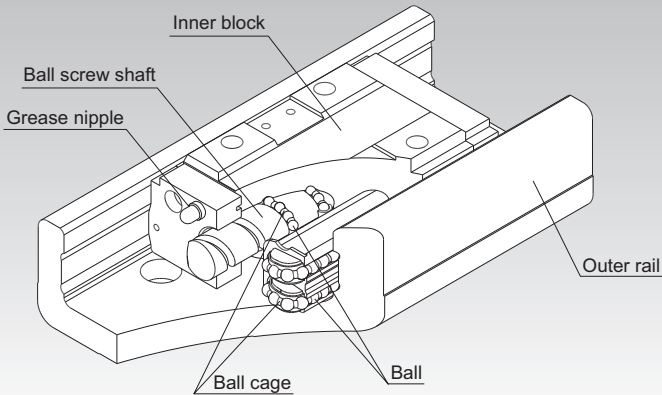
Structure of Caged Ball LM Guide Actuator Model SKR
